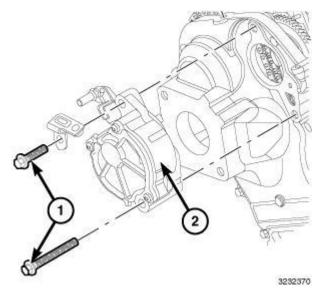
Vacuum Pump & Bolts Courtesy of CHRYSLER GROUP, LLC
